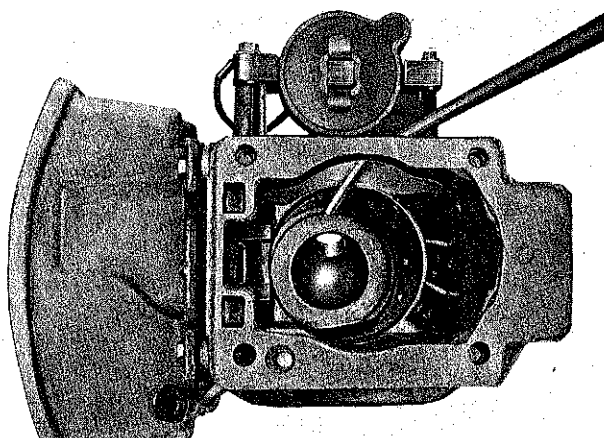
Before inserting the piston, the cylinder walls should be oiled. Note the bevel edge on the bottom of the cylinder which acts as a ring compressor to guide the rings into the cylinder.
